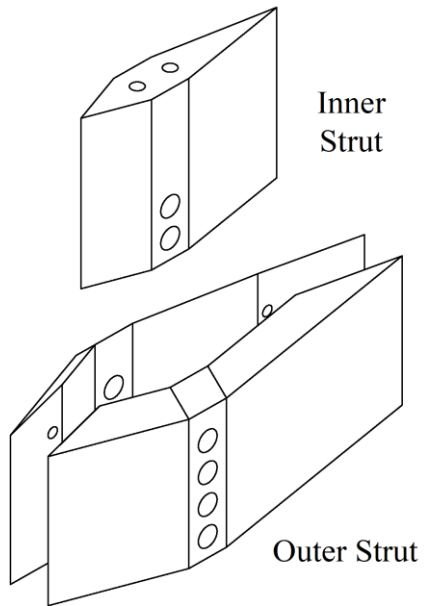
Mach stem generator wedge model inner and outer struts (exploded assembly).
